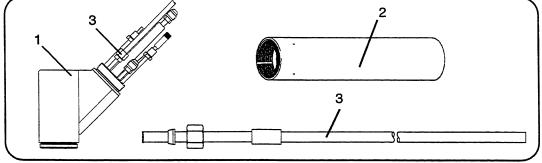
45° Torch Quick Disconnect Assembly, Mounting Sleeve and Torch Vent Hose
